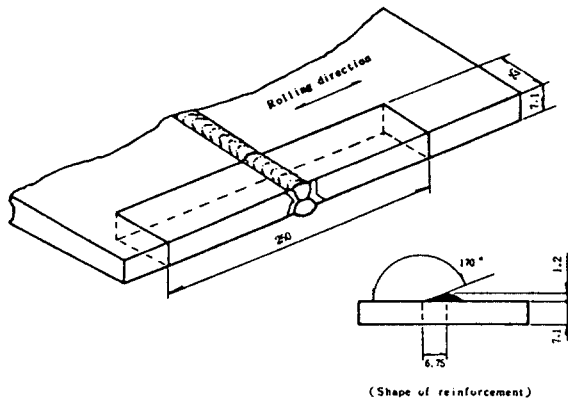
Welding plate configuration and extraction of specimen(mm).
